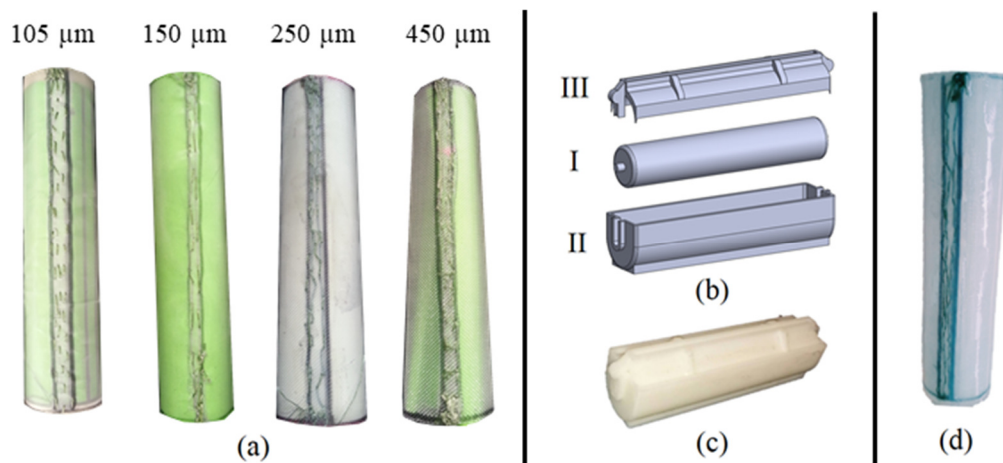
Fabrication stages of the VSL-V1: mesh sewn in the shape of a cylinder (a), mould components (I, II and III (b)) and mould assembled (c). Figure (d) shows the link after demoulding and removing of the silicone excess.
